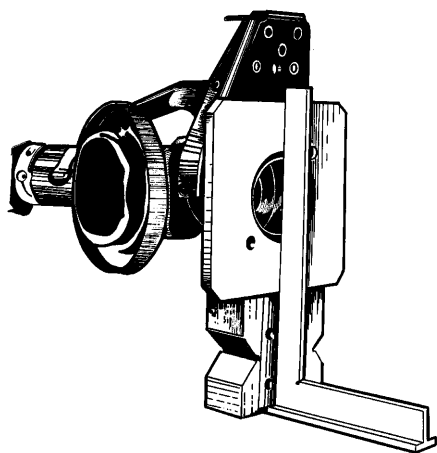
Checking for horizontal deformations of the rear axle beam using a try-square on the outside surface of flange A.70172
